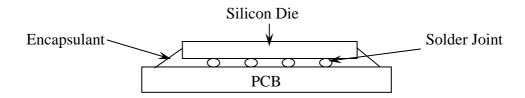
Schematic of a solder flip chip interconnect system (Pang, 2001a)
